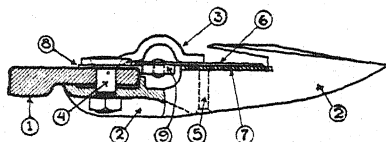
Cross section through cutting mechanism. 1—Cutter bar. 2—Guard. 3—Knife clip. 4—Bolt. 5—Rivet. 6—Knife. 7—Guard plate. 8—Wearing plate.
